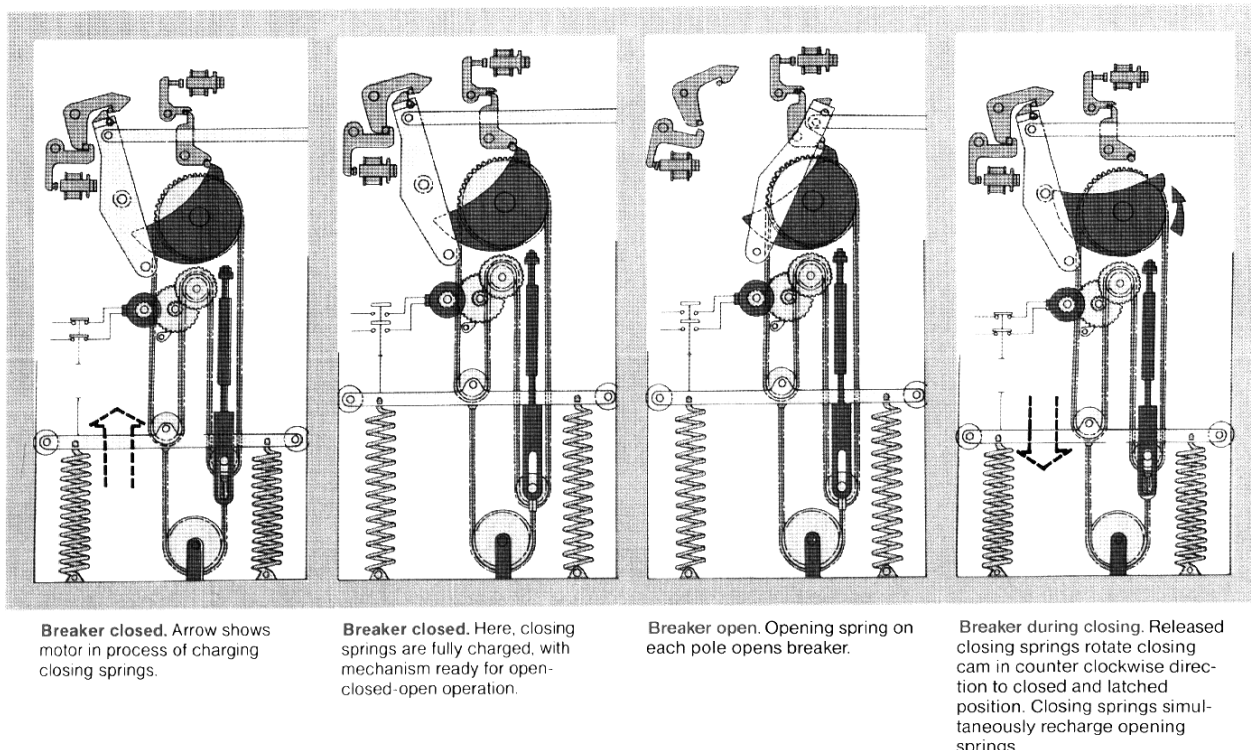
Operating sequence of the spring-closing mechanism, type BLG.
